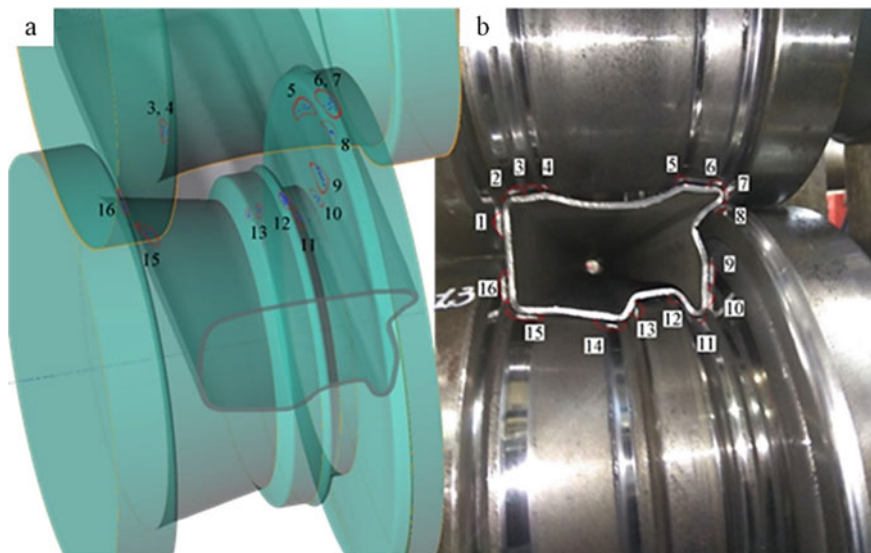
Contact zones between the tool and the workpiece in the model (a) and wear areas of the forming rolls of stand No. 13 (b)
